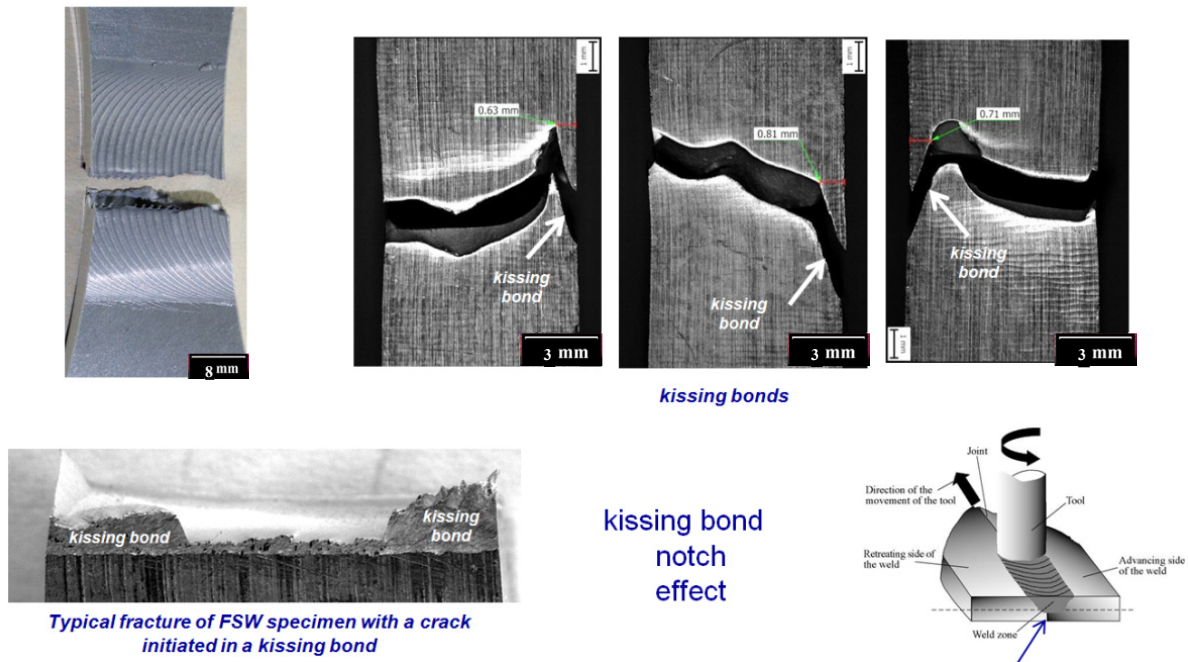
Fatigue cracks initiation from a kissing bond
